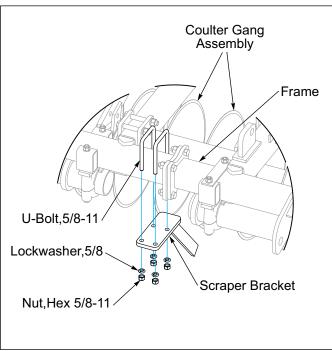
7 & 9 Shank Machine Scraper Between Coulter Gang Assemblies
